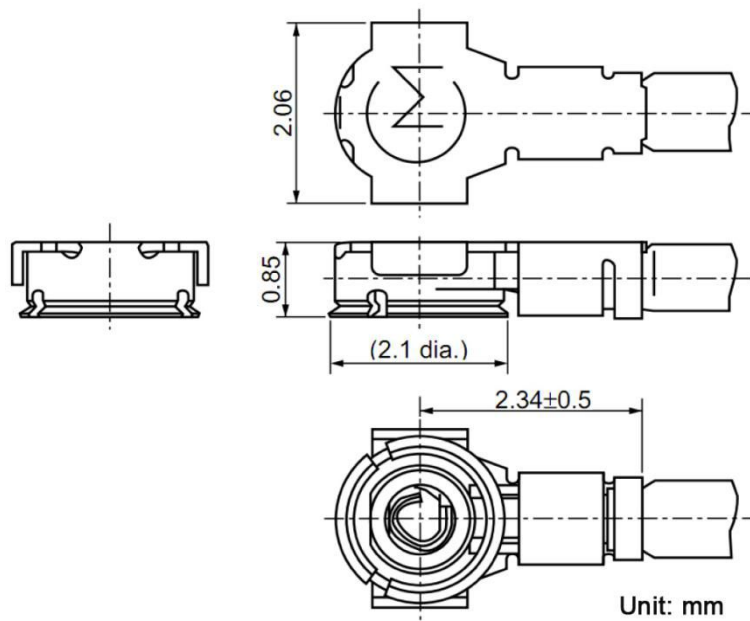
Dimension Figure of 0.81mm Coaxial Line Coupling with RF Connector
